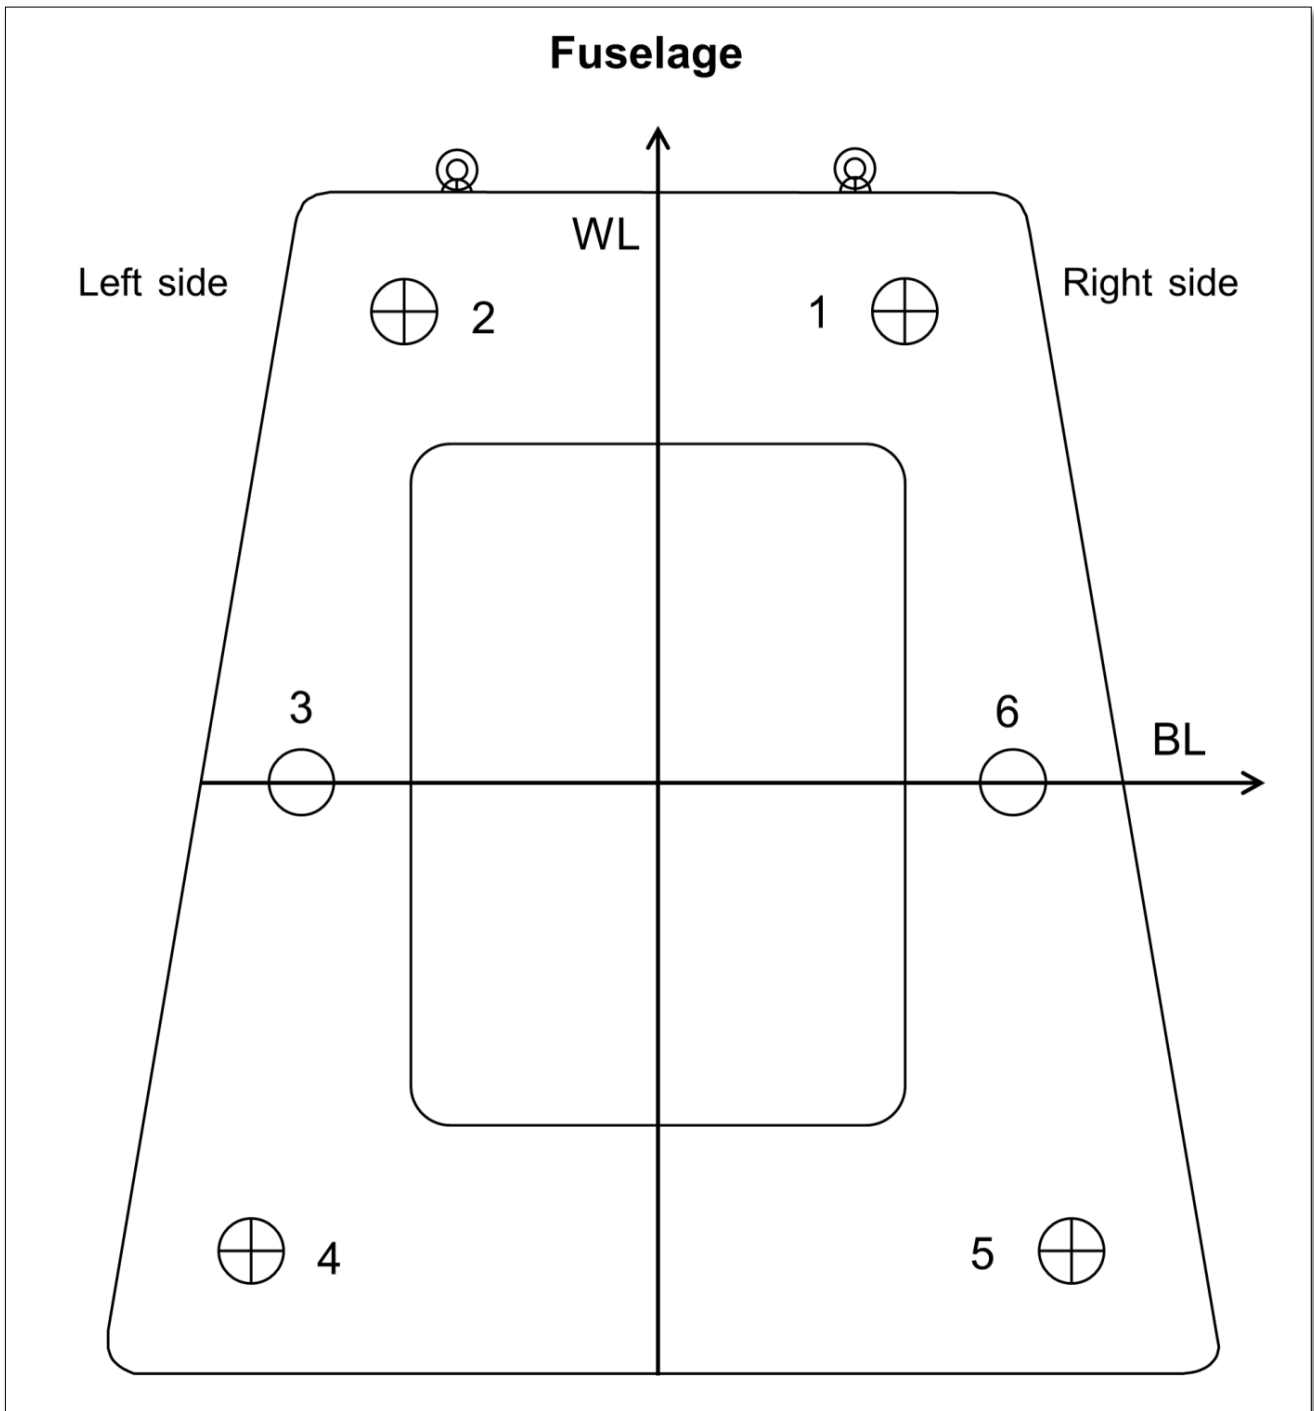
Positioning and Drilling Tool Kit P/N: 3G5350A00133A005A
